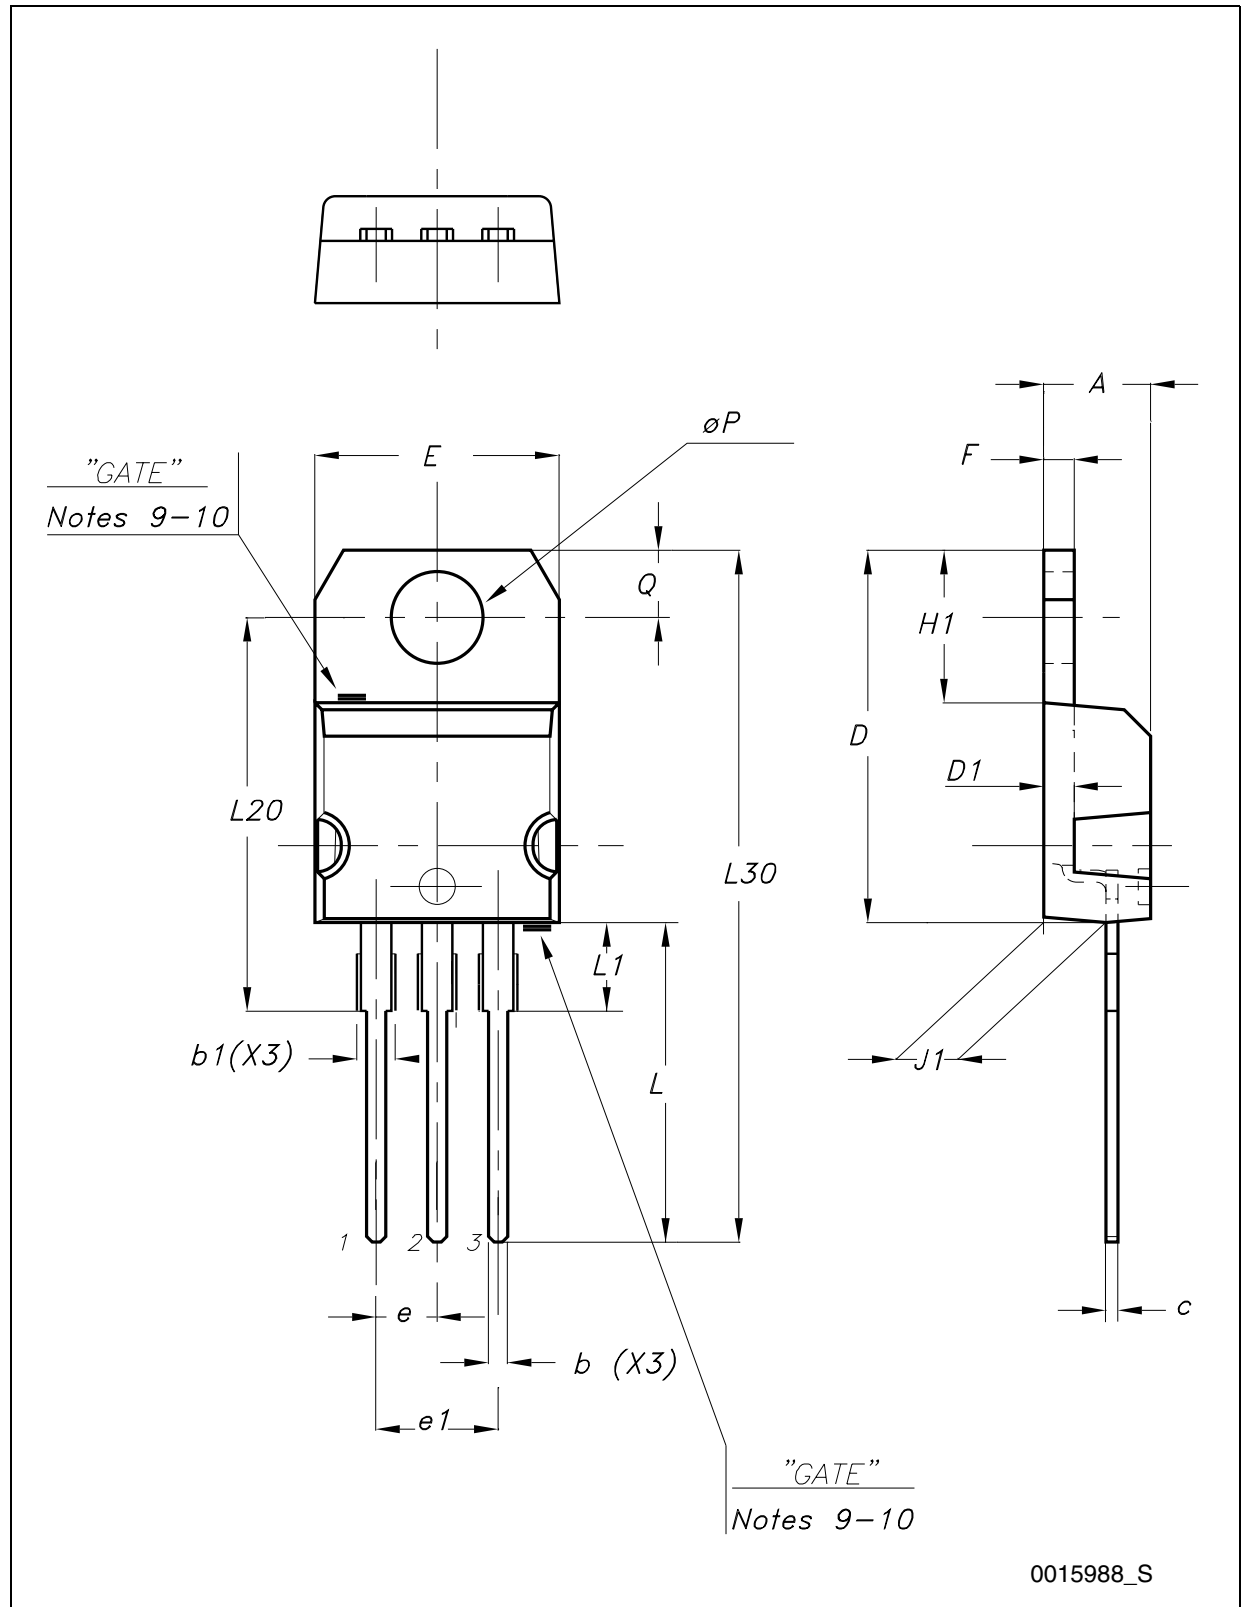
Drawing dimension TO-220 (type STD-ST Single Gauge)
